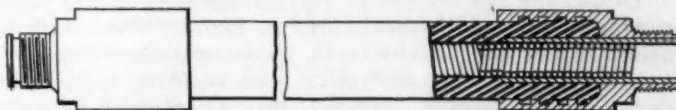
FLEXIBLE HOSE CONNECTION FROM TUBING ON THE FRAME TO WHEEL CYLINDERS
